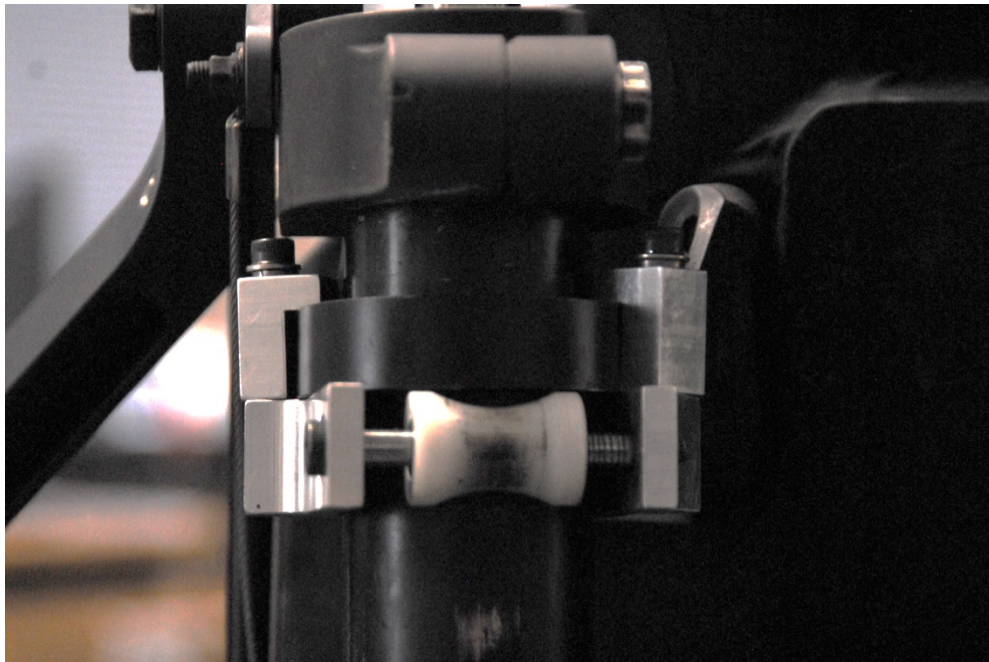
Roller Bearing Bracket on Upper guide Tube Bearing Bracket
